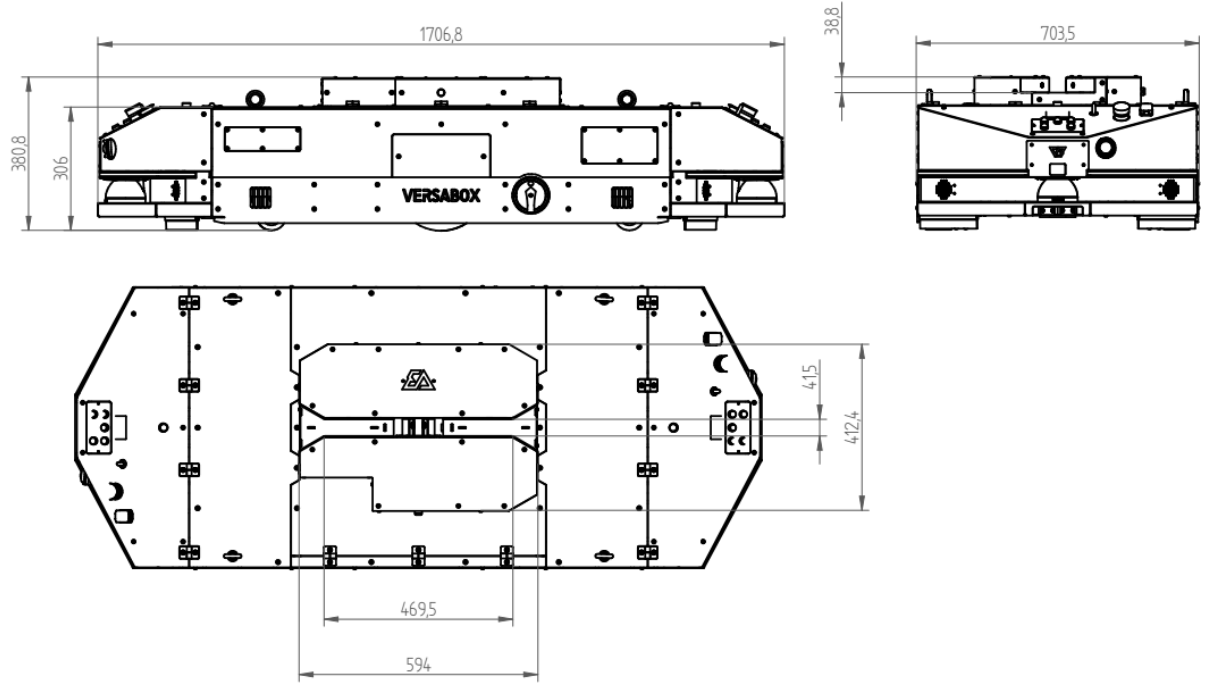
VERSABOT 500 Dimensions (with automatic coupler module)
